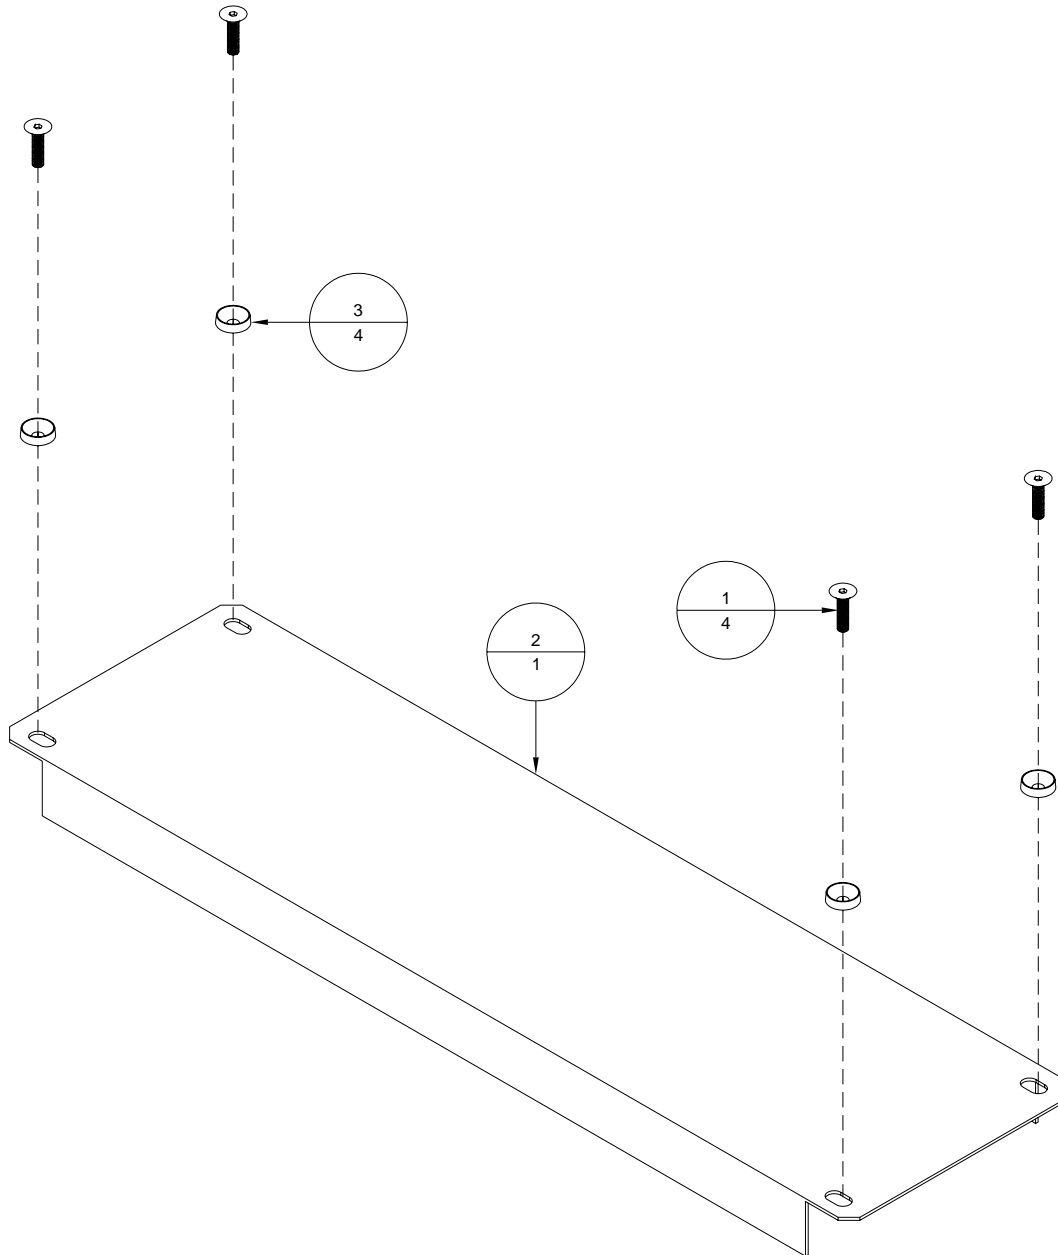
Cover Assembly, 3U, BK1700 (9103217A)
